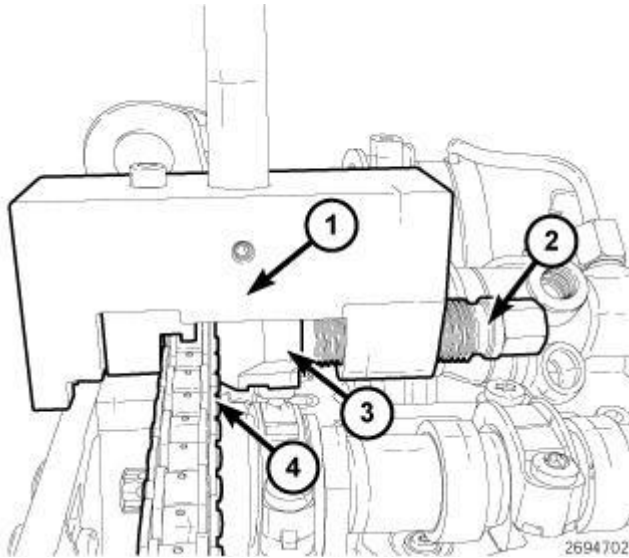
Installing Rivet Press Tool Onto Timing Chain
